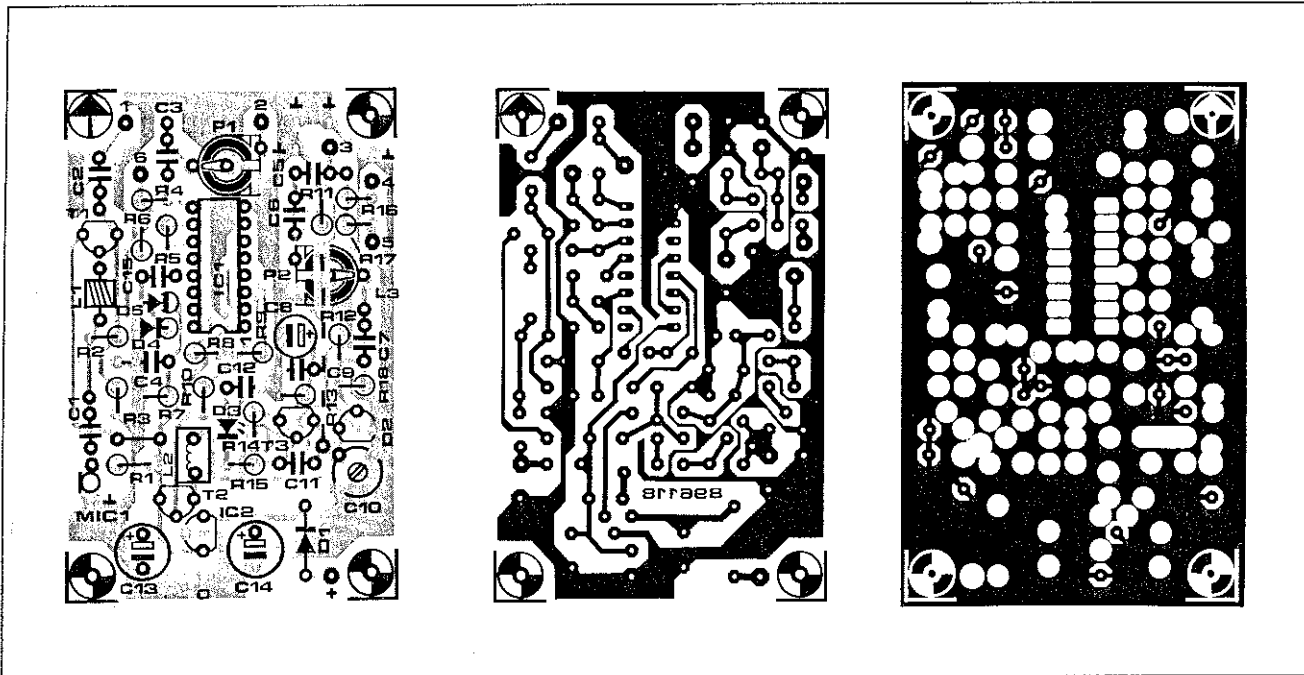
Track layouts and component mounting plan of the double-sided printed-circuit board for the mini FM transmitter.
